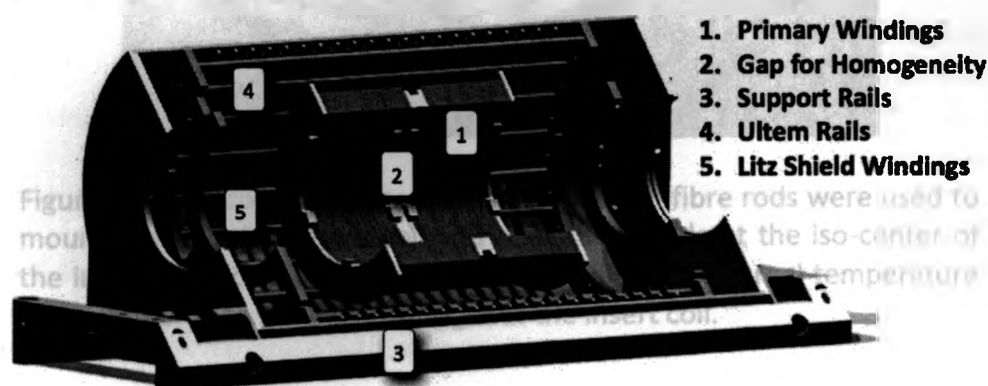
CAD drawing of dreMR coil. A computer aided design or CAD drawing of the insert system is shown. Note, the shield windings in this diagram are depicted as being equally spaced for convenience of illustration only.
